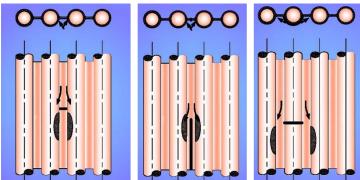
The above figures illustrate the flow of solids in CFBC furnace around the fin / tube butt weld projection. Tube leakages occur at the fin-tube weldment area only.
